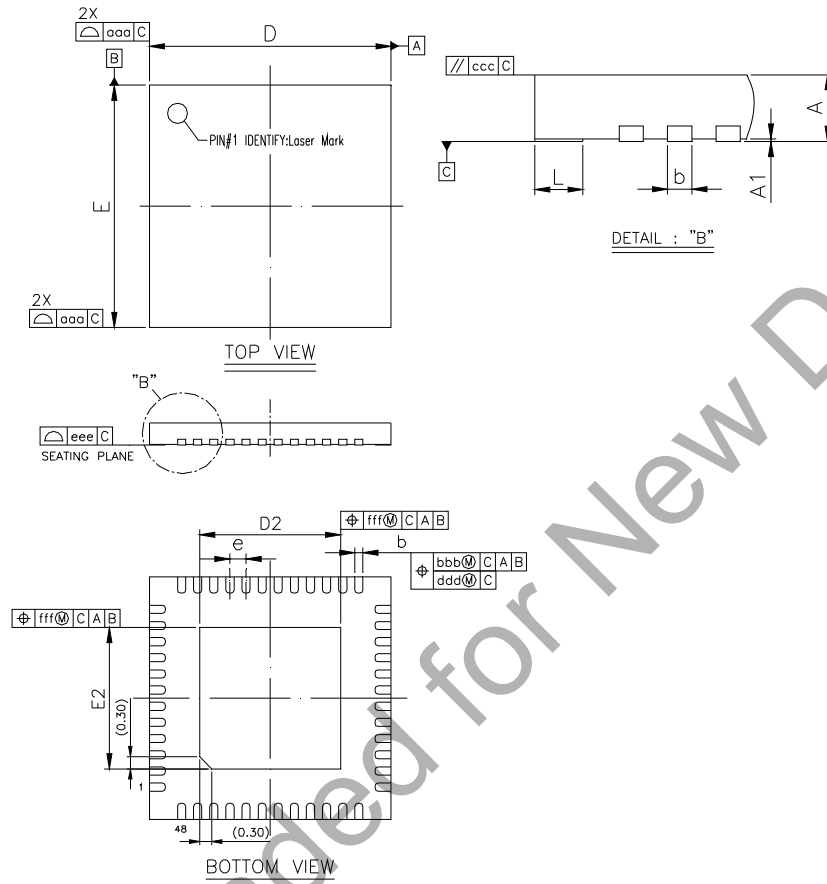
QFN-48 Package Drawing (6x6 mm)
